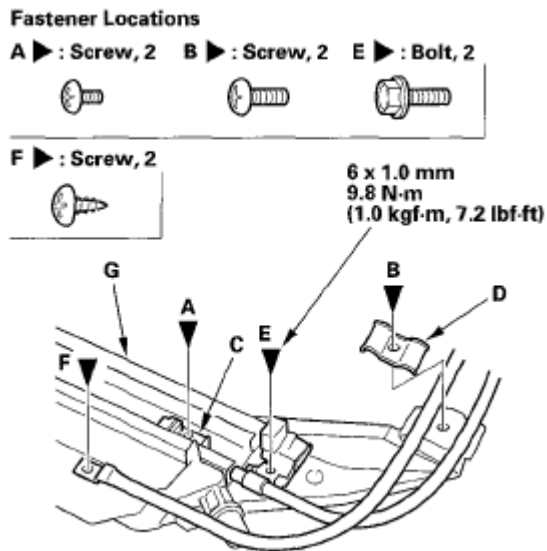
Identifying Drain Channel Slider And Cable Assembly With Torque Specifications
